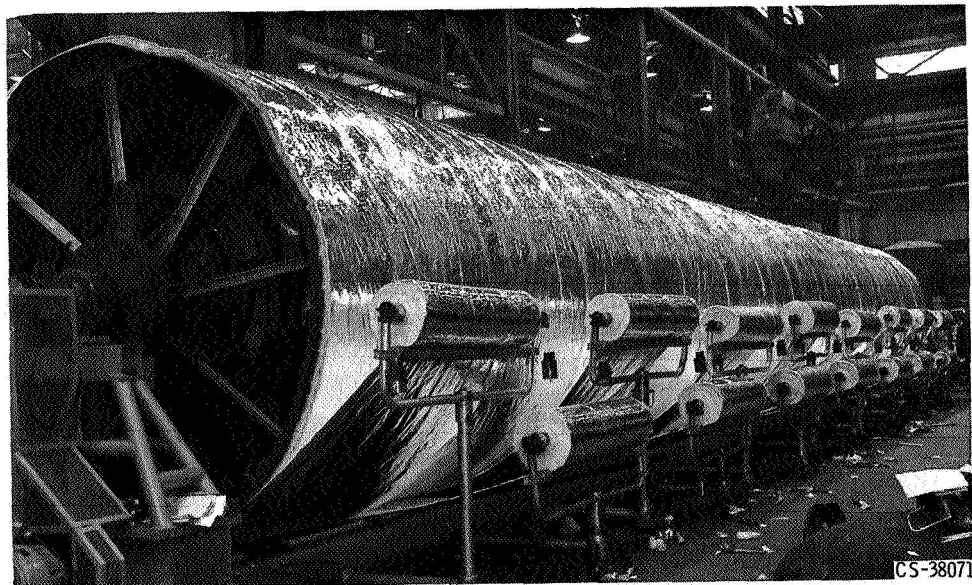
Machine winding of multilayer insulation. (Courtesy Linde Div., Union Carbide Corp.)
